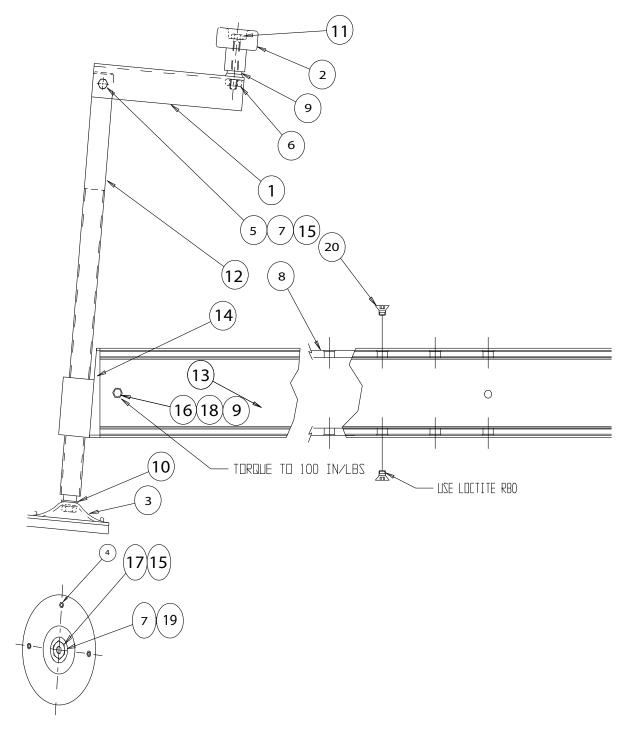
UL25/32/40 outrigger assembly illustration.
